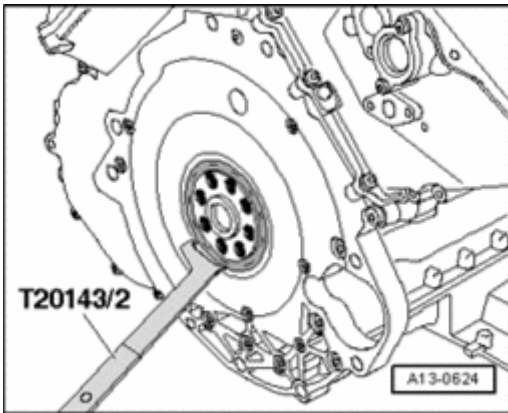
Prying Out Sealing Ring Using Extractor Lever T20143/2
